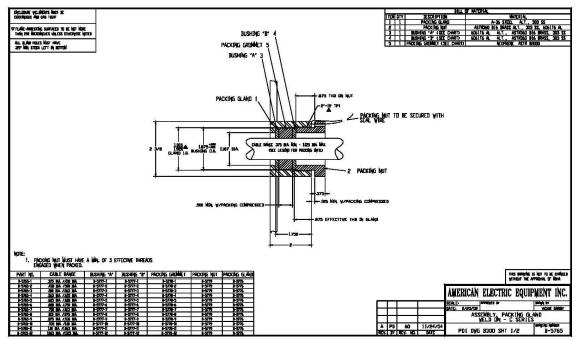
XP Enclosure Application OEM Large Packing Gland Specification Drawing
